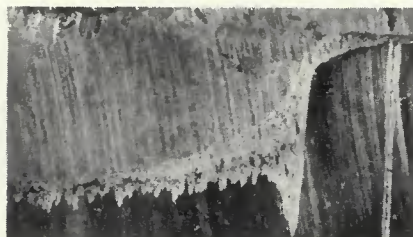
Longitudinal section through weld no. 9 (Mg casting alloy) X3.55, reduced 44%
